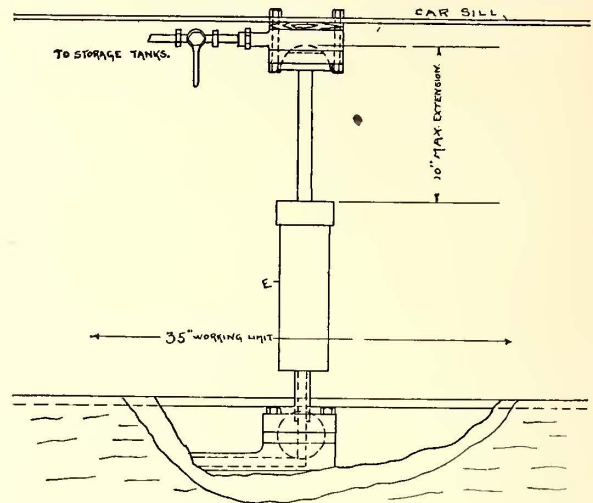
SIDE ELEVATION OF HOSE BOX, IN USE
